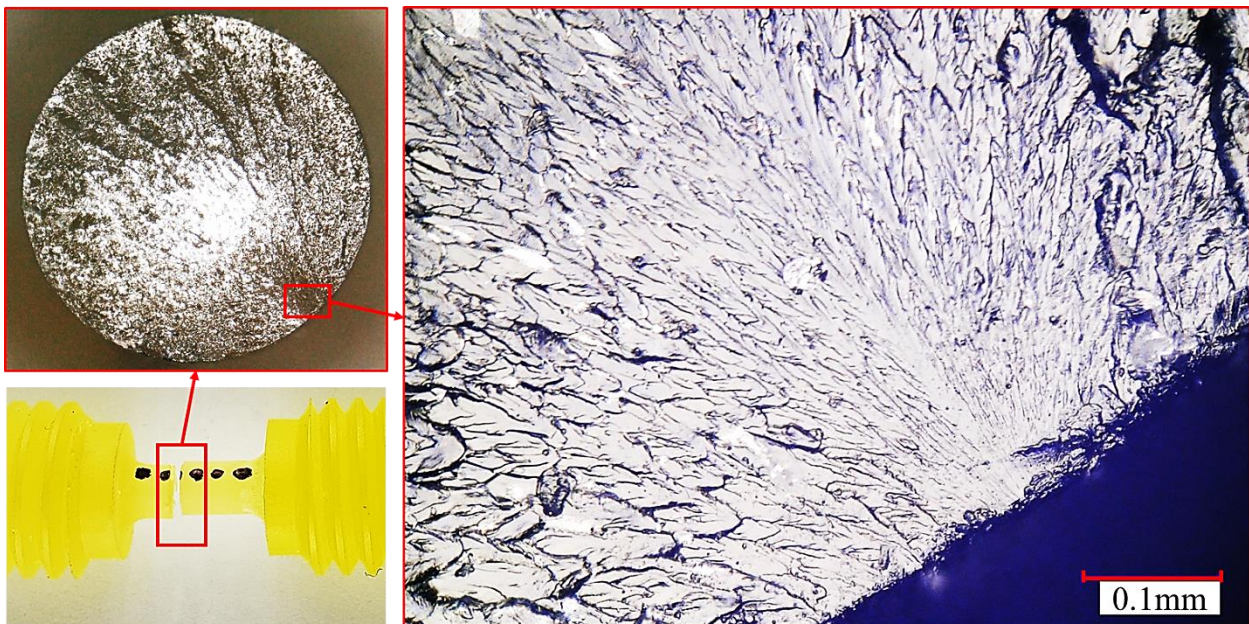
Fracture surface images for the high strain rate tensile test specimen (300 s^{-1})
